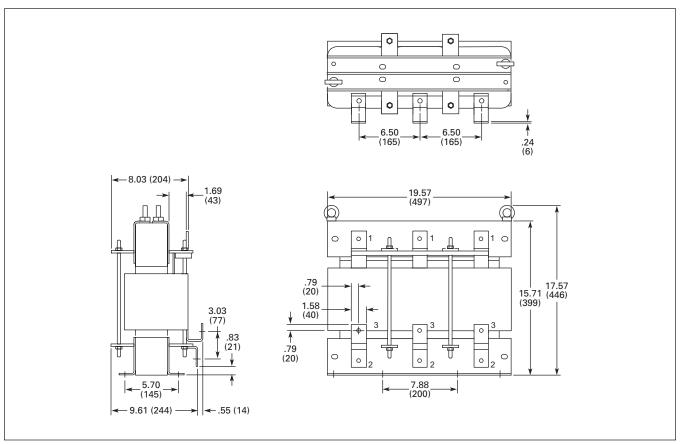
Dimensions of AC Choke CHK0520 in Inches (mm)
